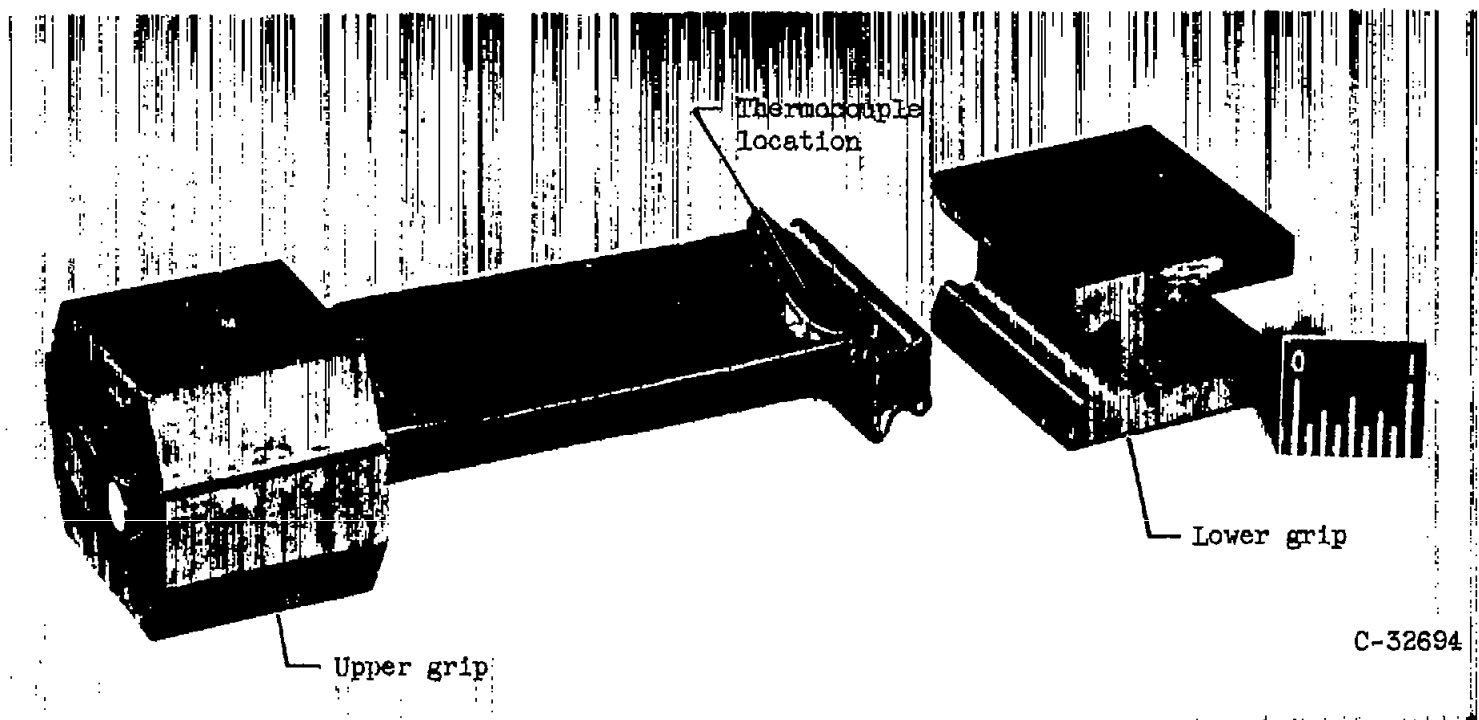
Typical tensile-test specimen showing method of gripping blade shell and base.
